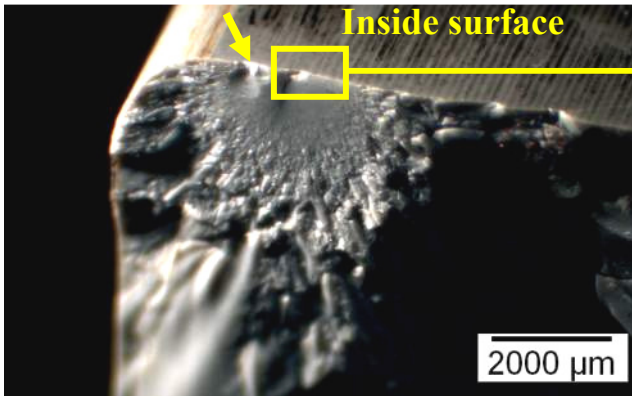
Macro-view from fractured piece No. 1 after coating for a SEM-examination. The mirror can be found on the inside surface near the edge (rectangle).
